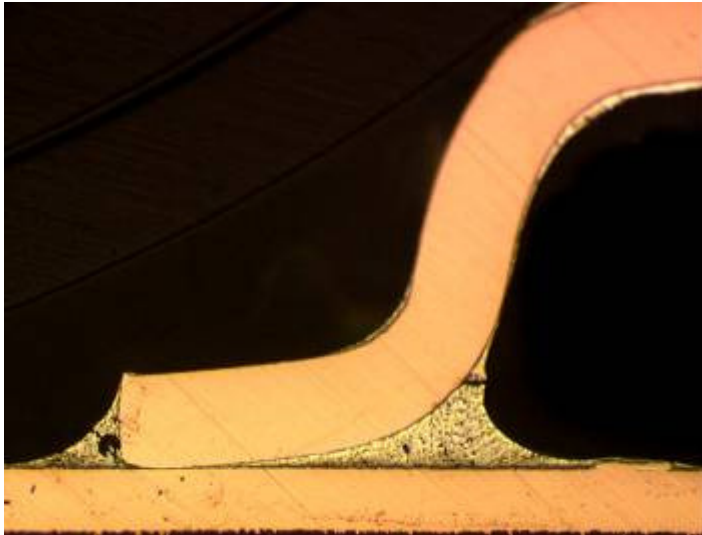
cross section, SN63, U31, left lead solder crack, 100x
